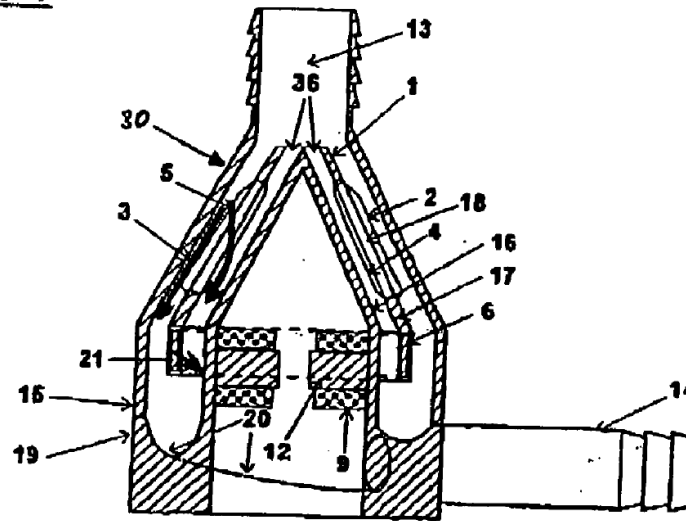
depicts hollow conical rotor 1 having vanes 2 and 4 that produce flow components 3 and 5, and rotor magnets 6. *Id.* ¶ 12. Rotor 1 rotates in housing 30, which comprises hollow conical upper part 15 with inlet 13, and lower part 19 with conical middle part 16 and outlet 14. *Id.* Rotor 1 also includes inlet opening 36 that distributes incoming liquid between the rotor and middle part 16. *Id.* Flow components 5 are directed axially against the conical surface of middle part 16 to effect centering of rotor 1. *Id.* Housing lower part 19 also includes stator 12 with coils 9 for generating a rotating magnetic field. *Id.* Rotor magnets 6 and stator 12 work together and are axially offset so that coupling force 21 is “effective at an angle and provide[s] an axial component for additional stabilizing of the rotor 1.” *Id.
